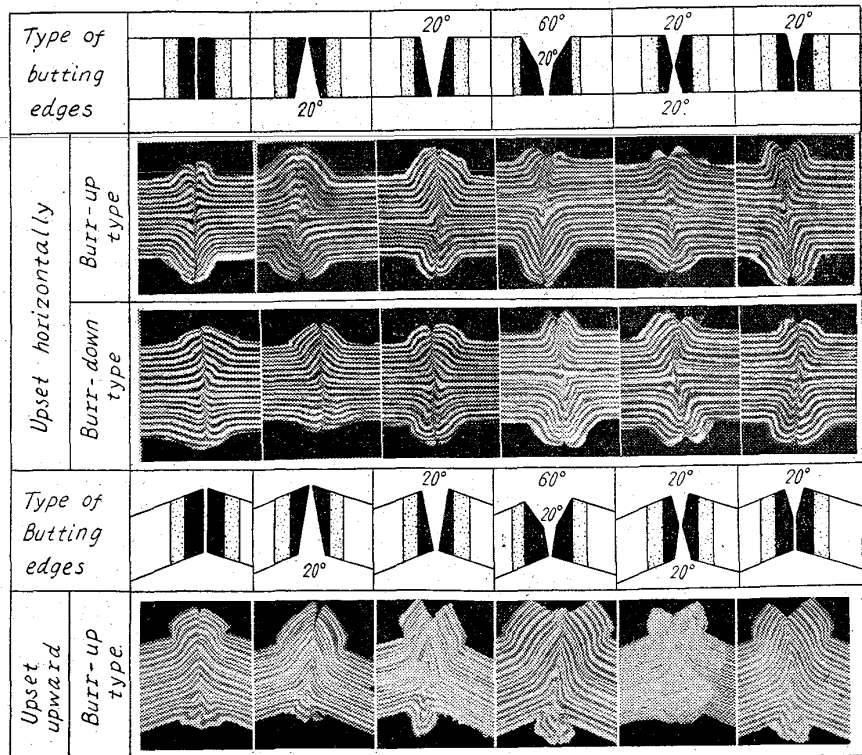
Metal flow in the welding. (Upsetting model using oil-clay.)
